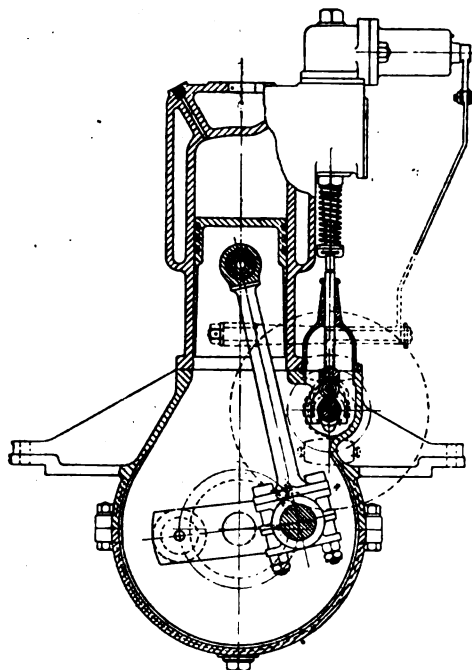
Sectional view of Star 7-h.p. Twin-cylinder Engine.
